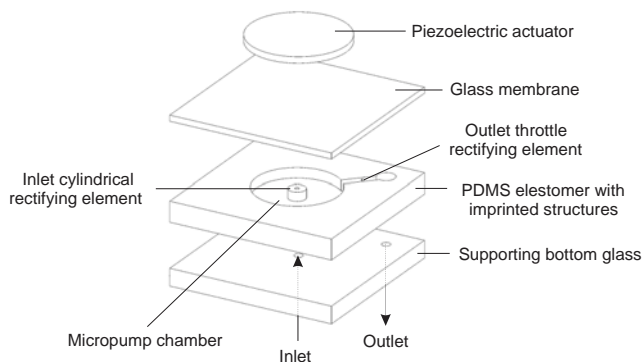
3-D exploded view of a typical microcylinder pump structure (dimensions are not to scale)
